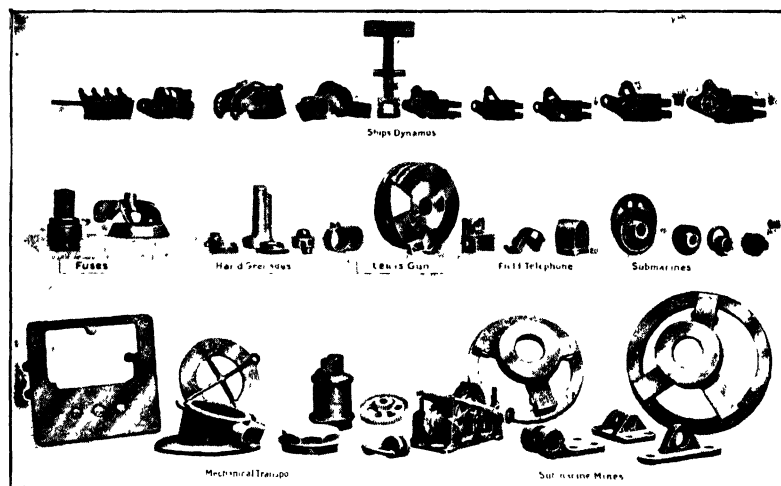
A.—Samples of die castings in brass, aluminium-bronze, and aluminium.
